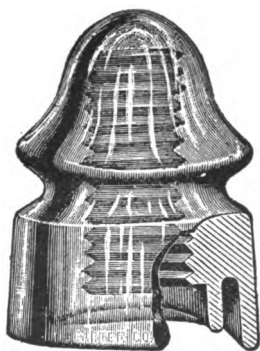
DOUBLE PETTICOAT DEEP-GROOVE INSULATOR.
